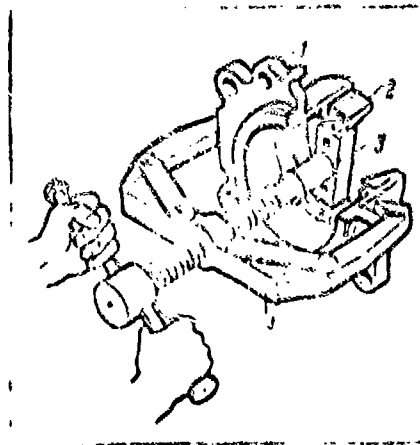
Pressing the outer bearing races of the spindle pinion gear shaft out of the carrier with a 20P-7968 puller:
